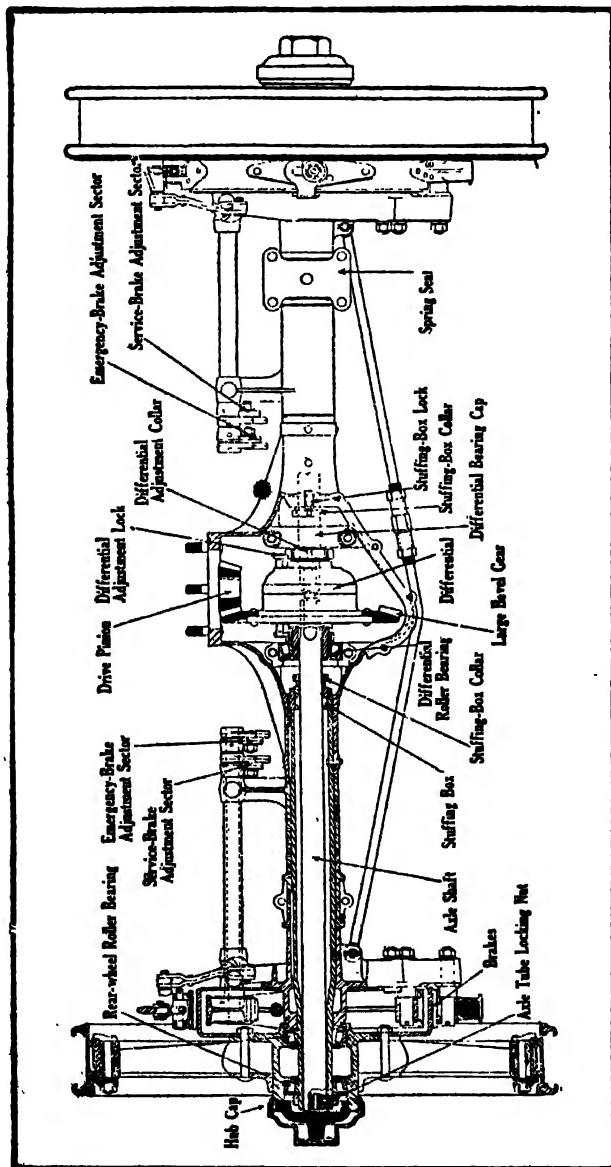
Part Sectional View Showing Overland Full Floating Rear Axle.
